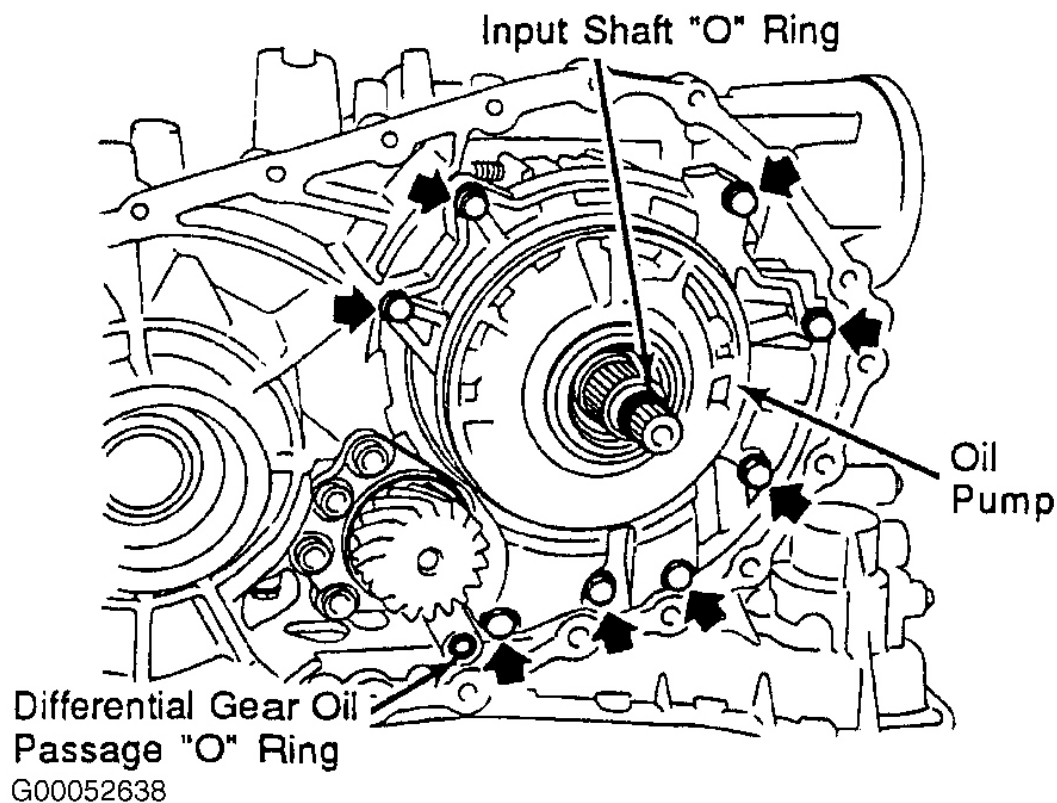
Locating Oil Pump Bolts & "O" Ring
